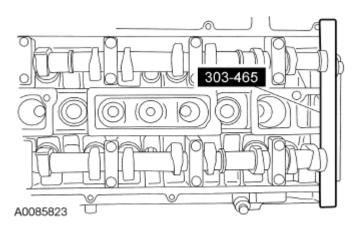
Locating Camshaft Drive Gear Bolts Courtesy of FORD MOTOR CO.
